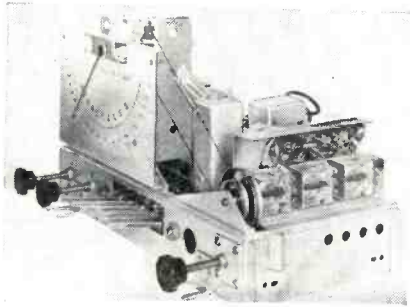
Construction of the contacts on the eggbeater tuner. These are beryllium copper stock, silver plated and backed up by flat silver steel springs.
